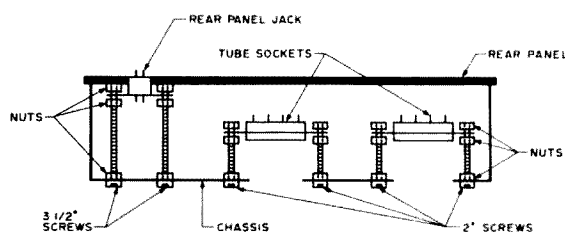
Mounting arrangement for tube sockets and parts used in the amplifier.
